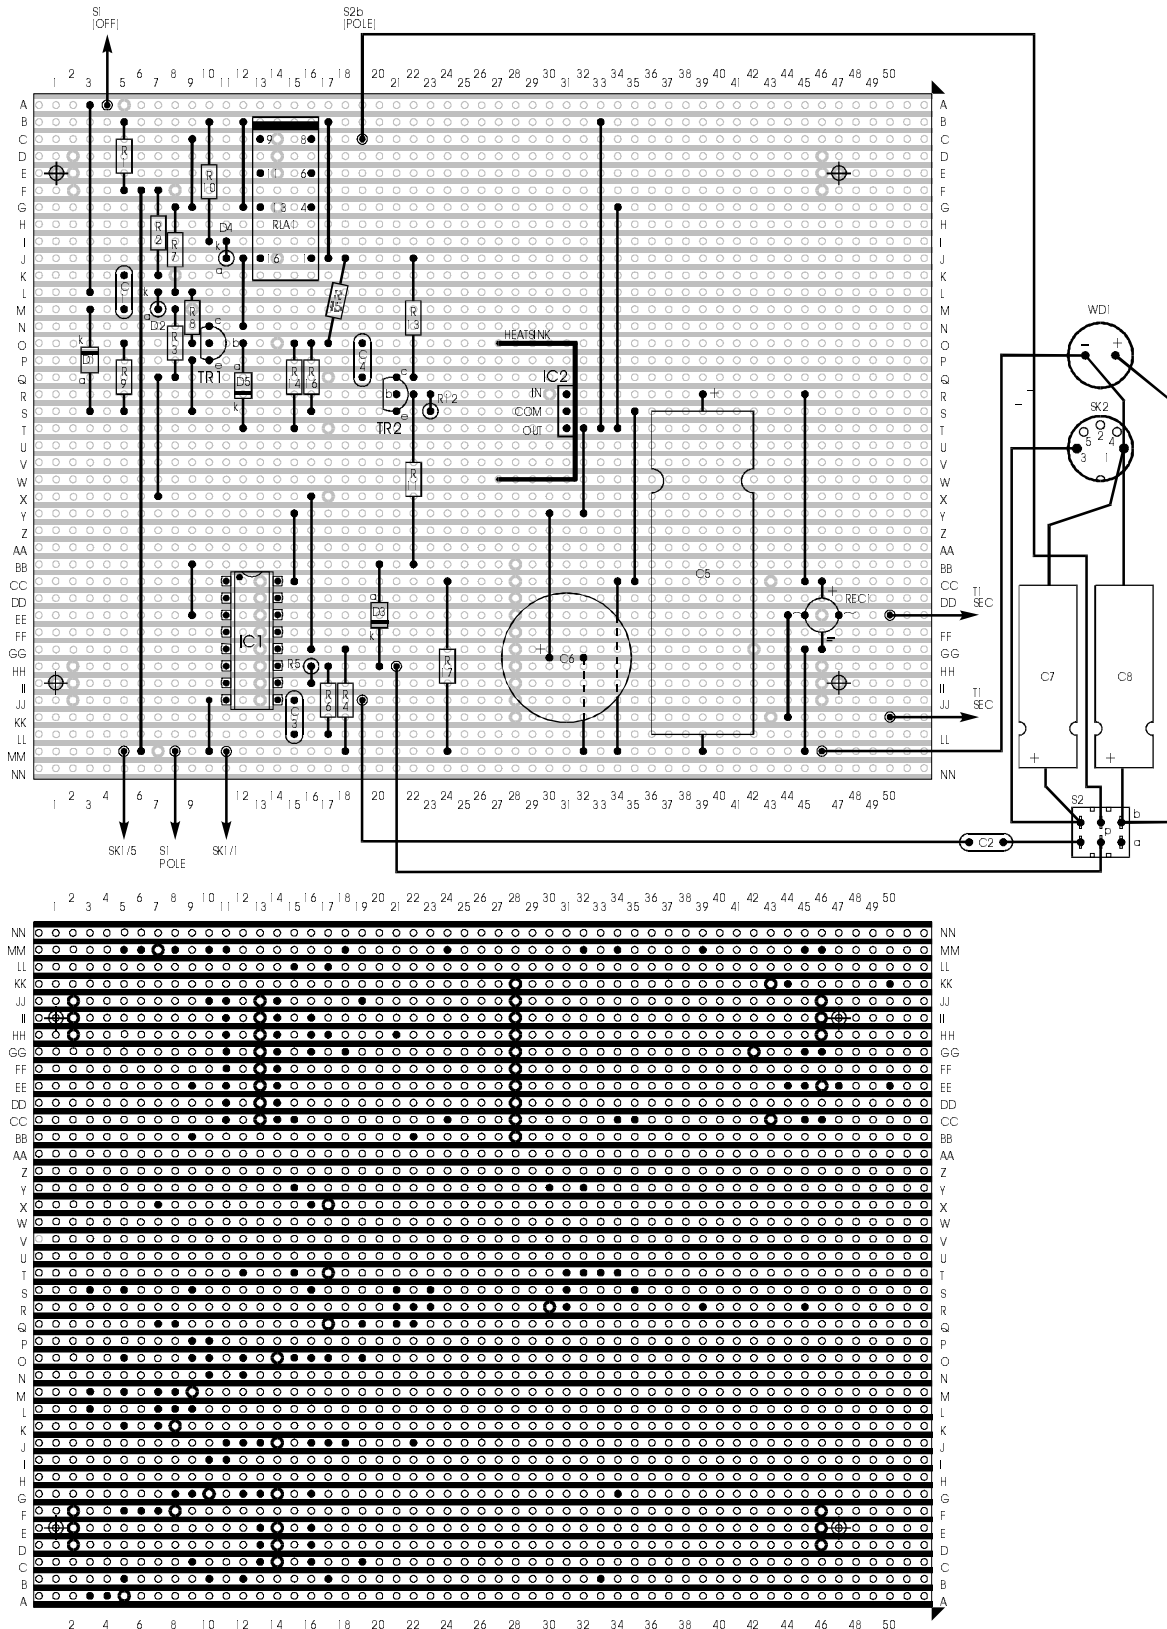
Stripboard component layout and details of breaks required in the underside copper strips. Wiring to the mains transformer, switches and sockets will depend on types used.
